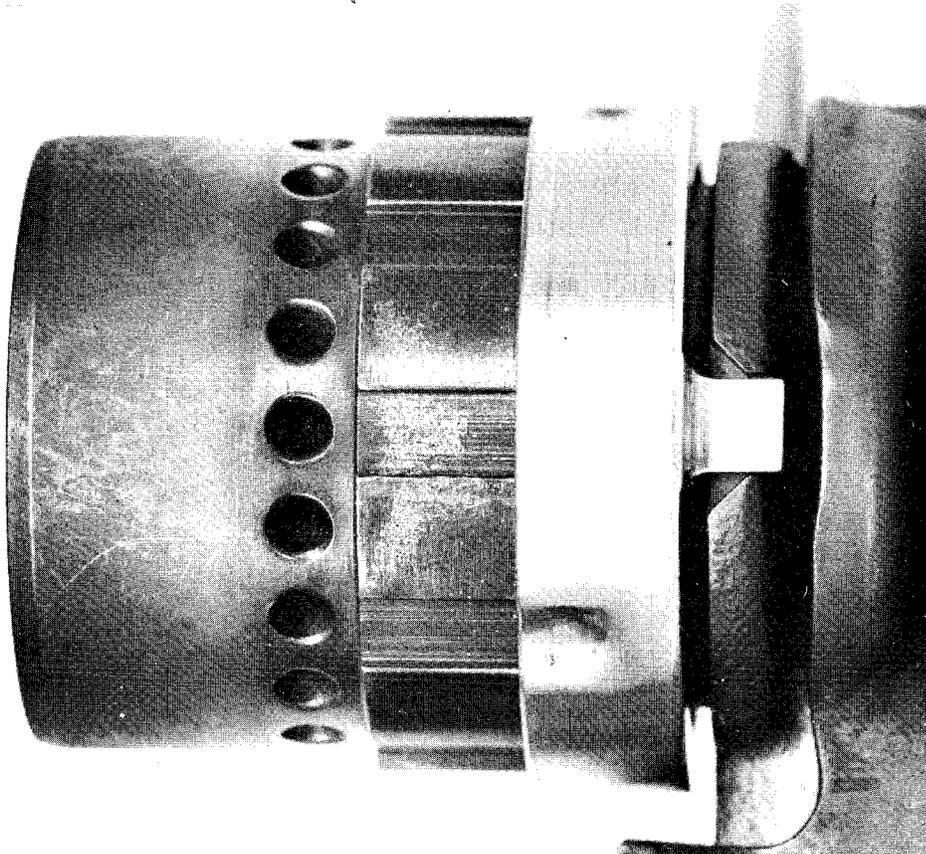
LOW-SMOKE COMBUSTION CHAMBER FOR JT8D-11 ENGINE
